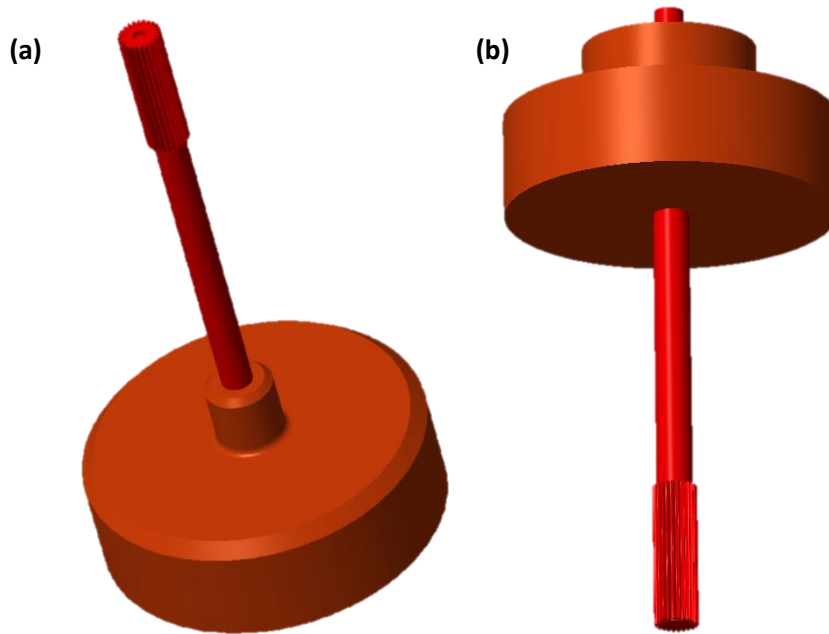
Gear punches assembling (a) lower, (b) upper.
